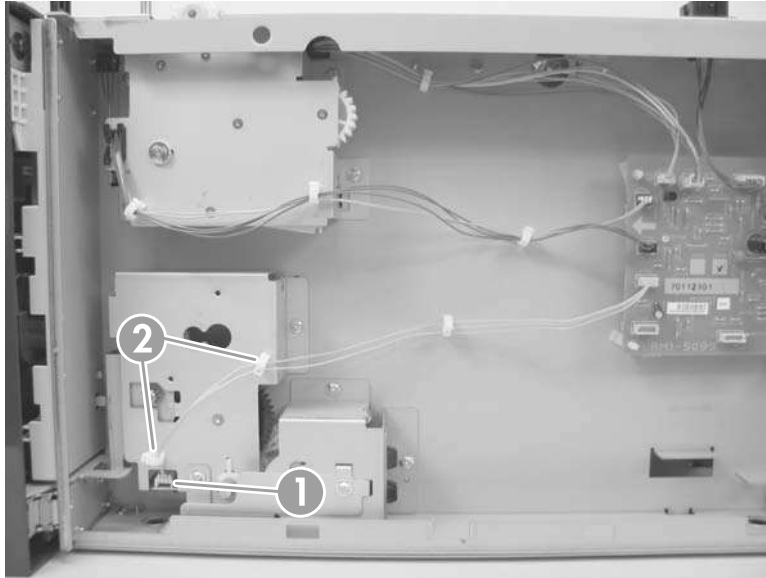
Remove the 1,500-sheet feeder driver PCA (2 of 2)
